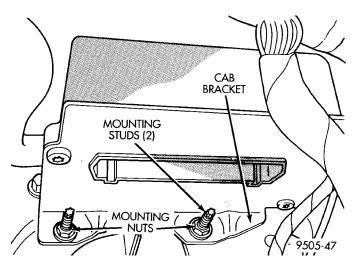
CAB Bracket To Kick Panel Mounting INSTALL
